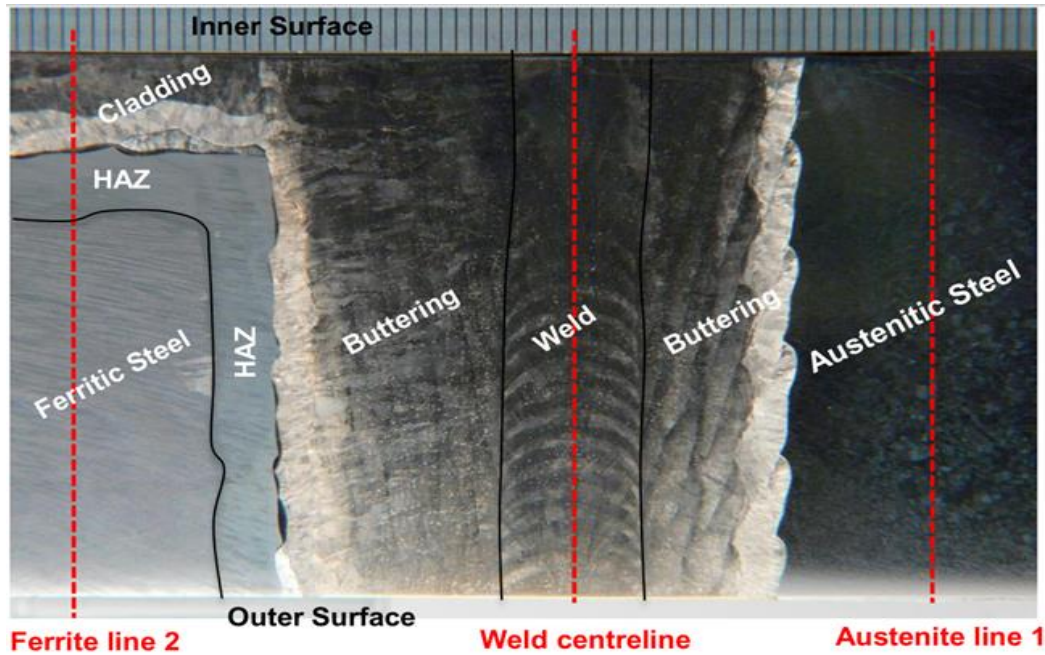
Dissimilar metal weld between ferritic steel and austenitic steel manufactured by Areva. Source: Traore, Y. et al. (2014).
